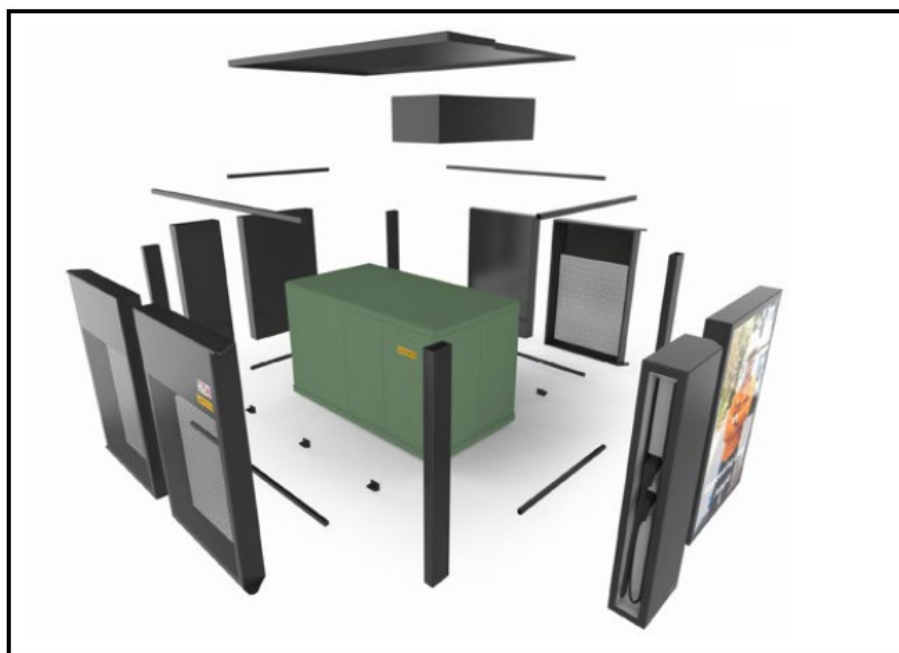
Deconstructed diagram of EV charge station and signage over substation
